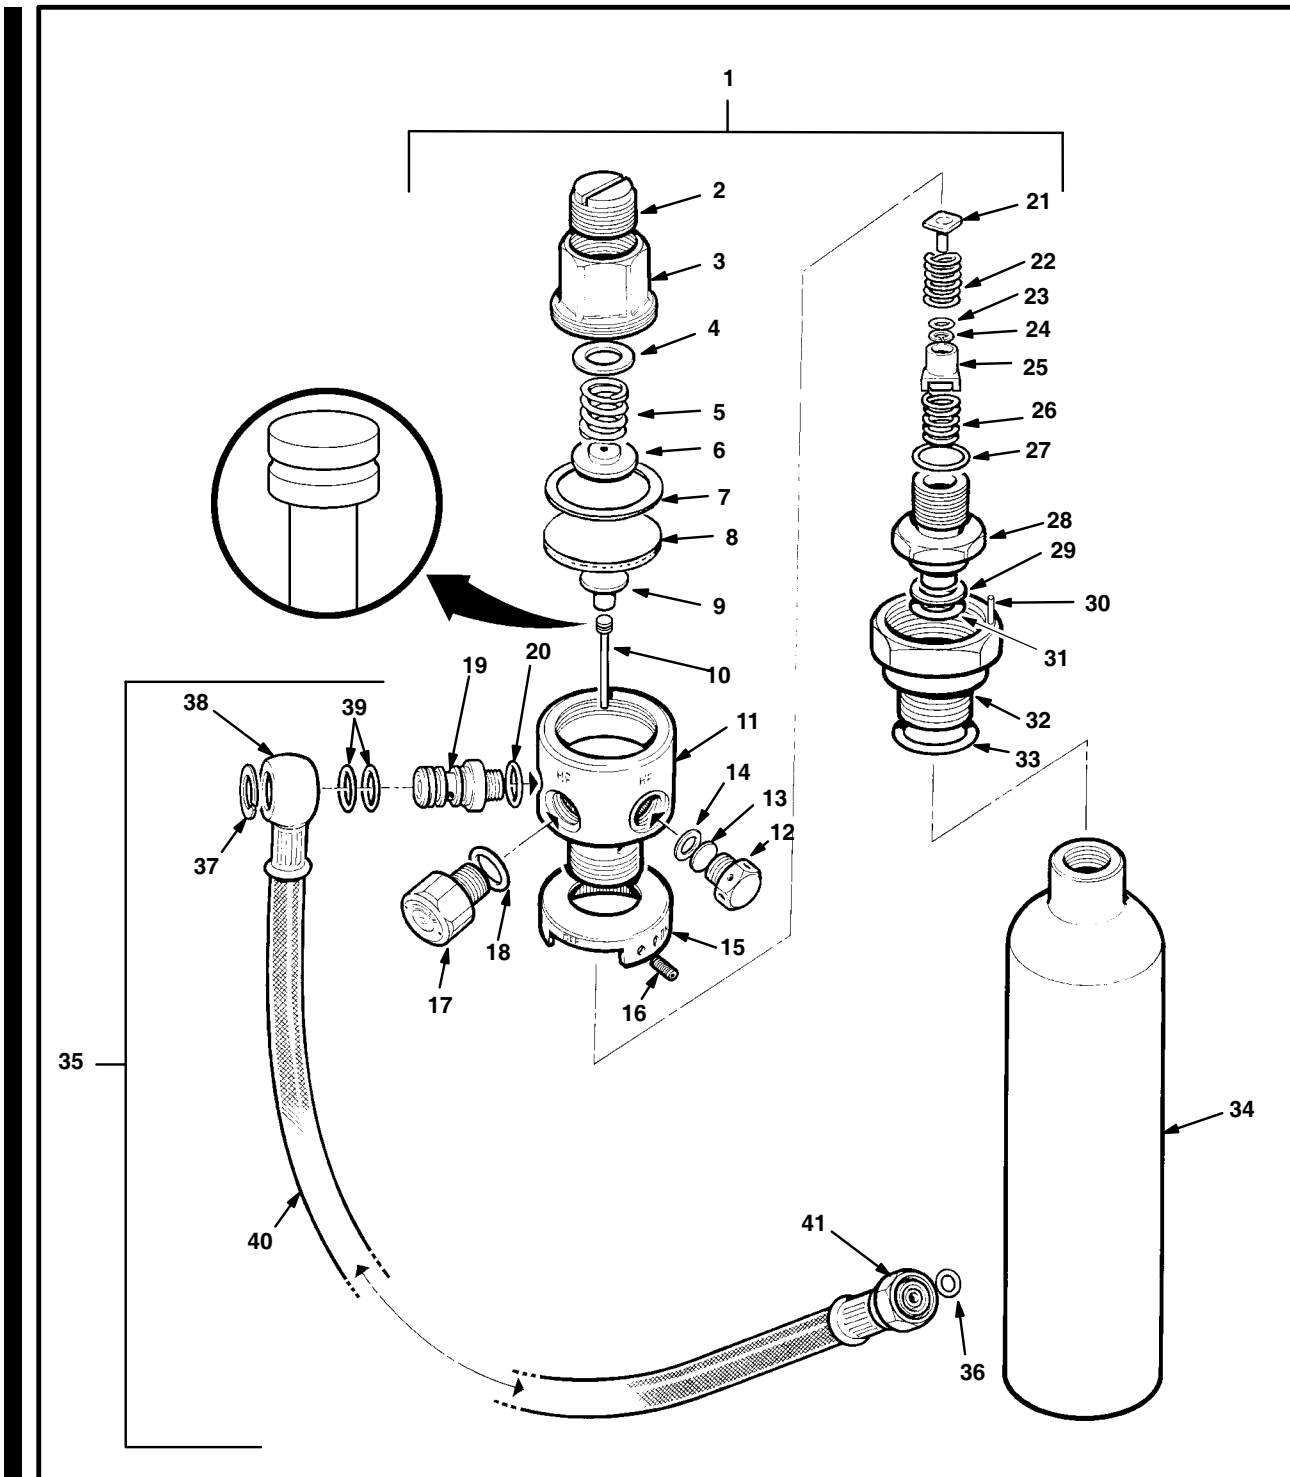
(Sheet 1 of 3) First Stage Regulator Assembly
